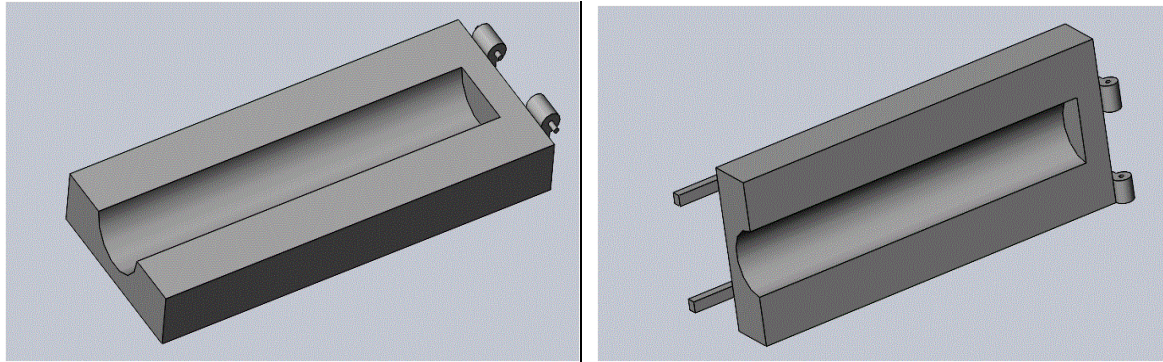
Mould (a) drag (bottom mold) (b) cope (upper mold)
